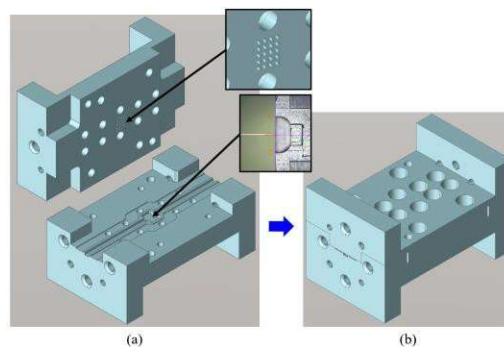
Type-1 MMIC-to-WG transition test fixture: (a) metalwork pieces of the test fixture; (b) 3D model of the whole assembly.
